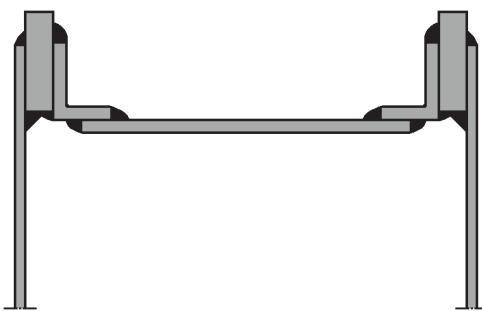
Door guide made of steel with 12 welds.
